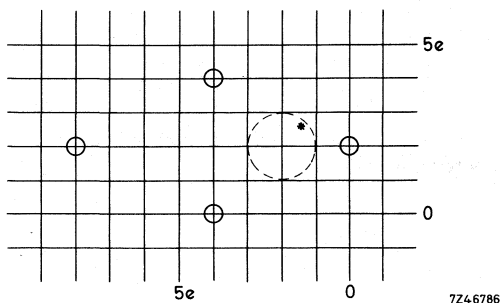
Hole pattern for mounting on a printed-wiring board. Grid hole diameter =  $1,3 \pm 0,1$  mm;  $e = 2,54$  mm (0,1 in).
